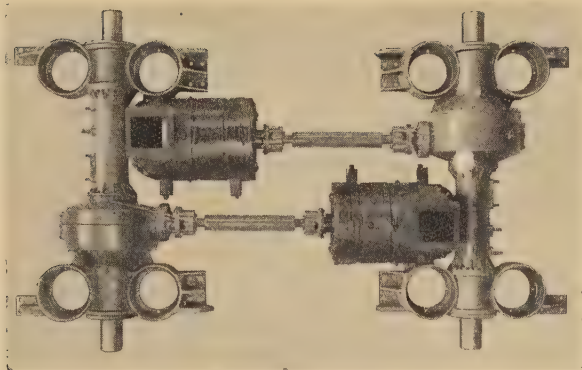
Mounting arrangement of motors, propeller shafts, gear units, and axles in Presidents Conference Committee streetcar truck
